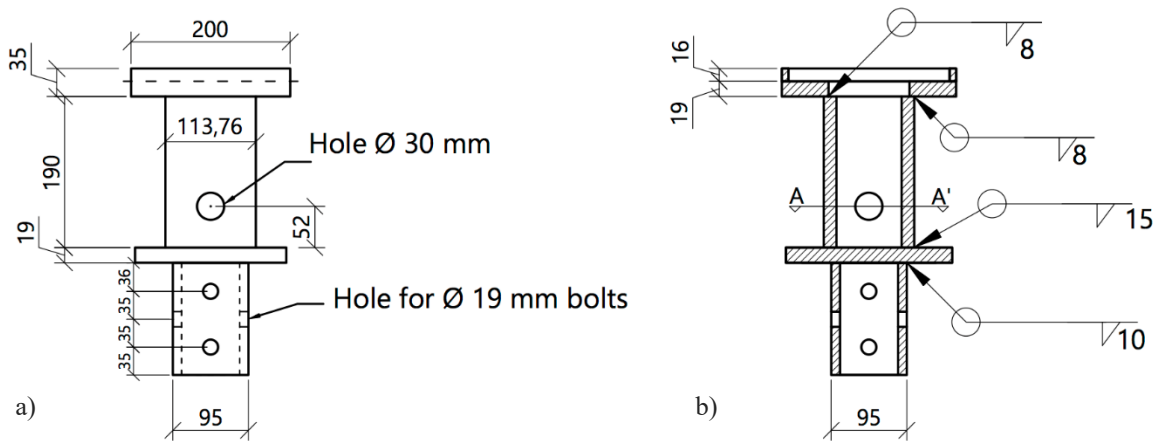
Adapter used to install the helical pile into the ground: a) side view; and b) longitudinal section. Dimensions in mm. Not to scale.
